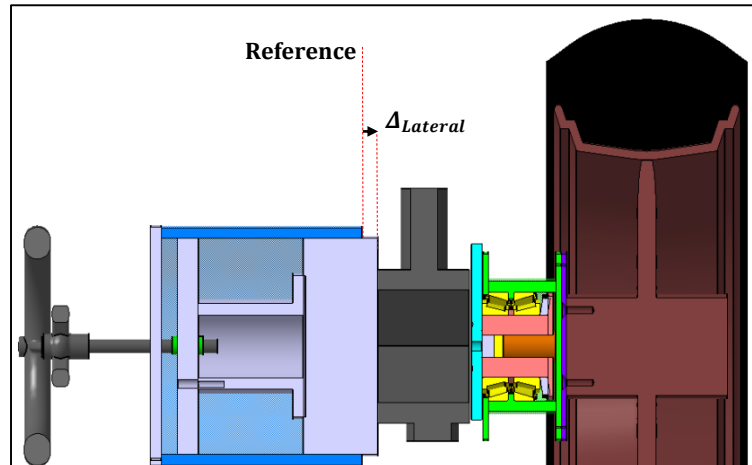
Lateral adjustment mechanism (Cross section of wheel assembly).
